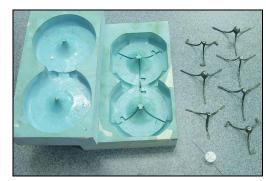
Two CNC milled wheg tools and an array of tested wheg designs
